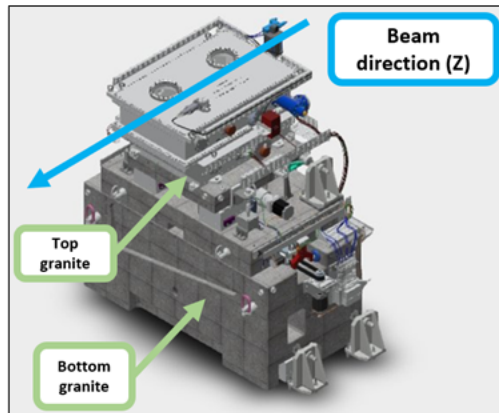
Assembly drawing containing granites and the vacuum vessel (where the internal mechanism is assembled).
